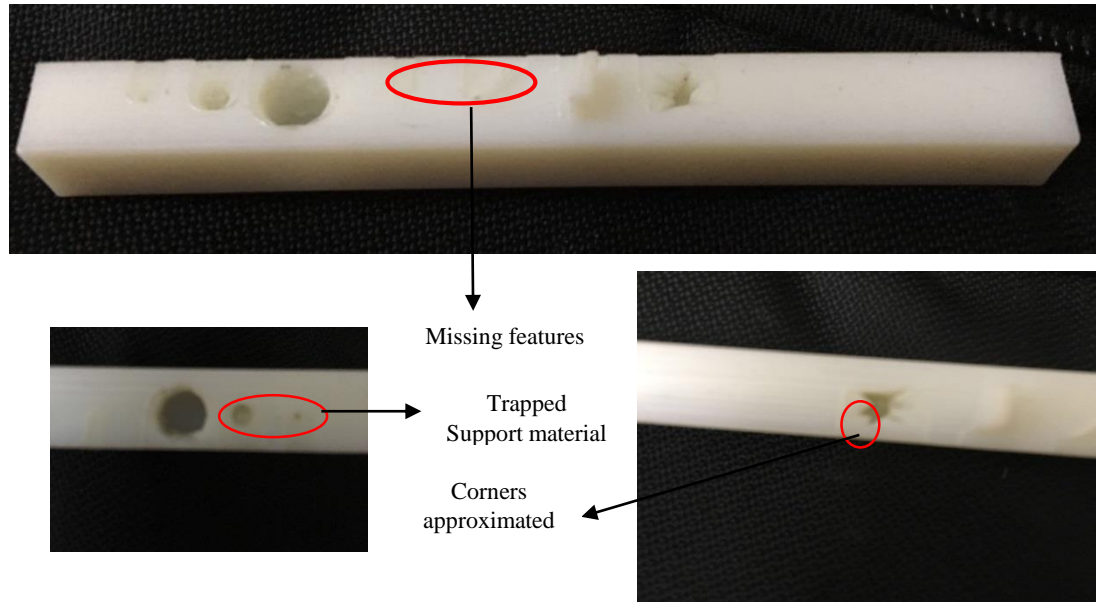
a) Sample widget manufactured using Material Jetting b) enlarged image of printed part showing trapped support c) enlarged image of printed part showing star shaped negative feature
